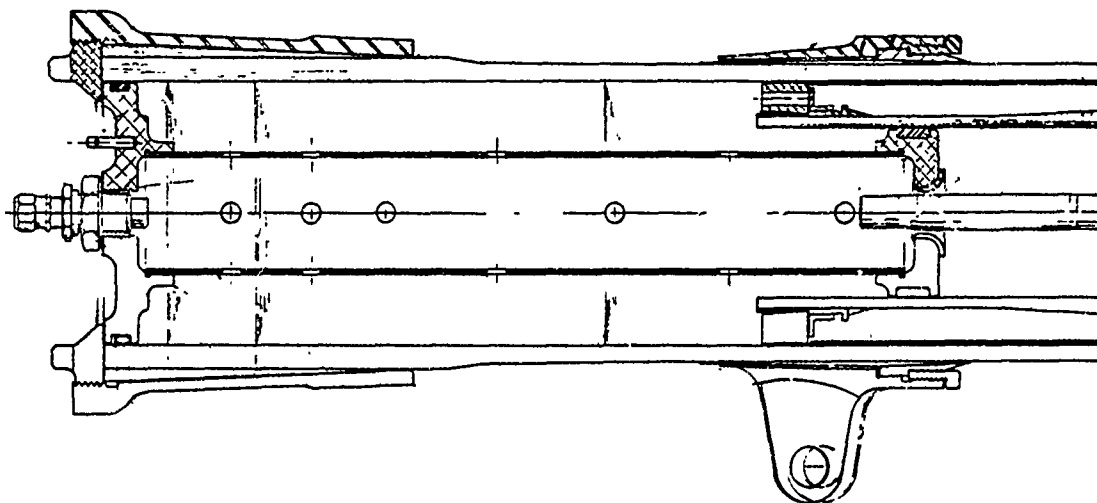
Boron-Epoxy Torque Arm Assembly (Proposed Design)
